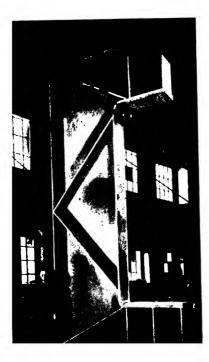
300 Ton Straightening Press (Hydraulic Engineering Co., Ltd., Chester)
